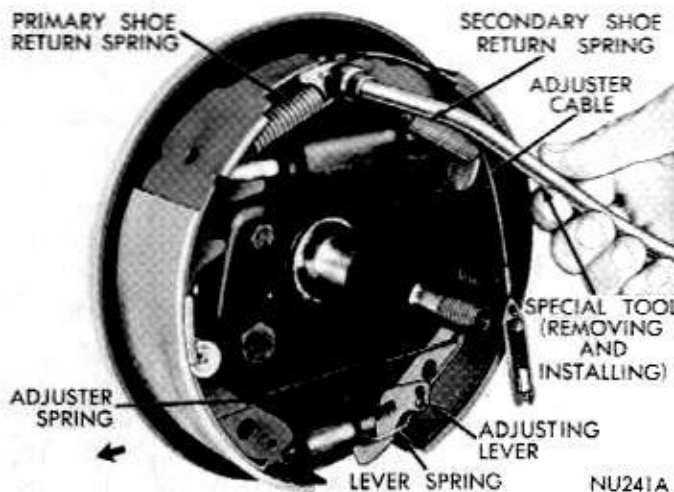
Removing or Installing Shoe Return Springs (Left Front)
